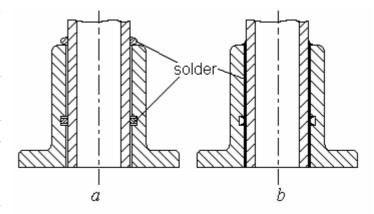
Scheme of capillary soldering: a – before soldering; b – after soldering
